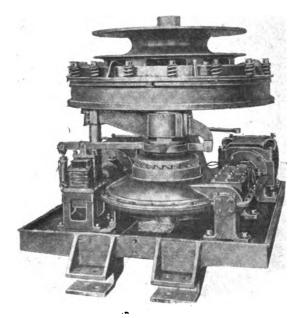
WINDLASS AND BASE ASSEMBLED COMPLETE, WITH MOTORS.
